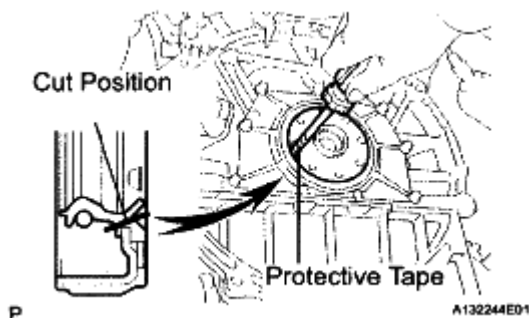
Prying Out Engine Rear Oil Seal Using Screwdriver
